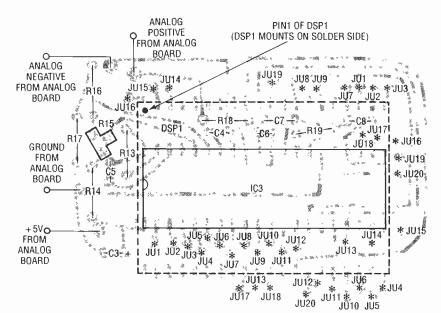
PARTS-PLACEMENT DIAGRAM for the digital board. Note that the LCD module mounts on the solder side of the board after all other components are installed *and* the board is tested (see text for details). Also note the twenty pairs of pads labelled JU1–JU20. You must solder a jumper wire between each pair of pads; for example, JU1 to JU1, JU2 to JU2, and so on.
